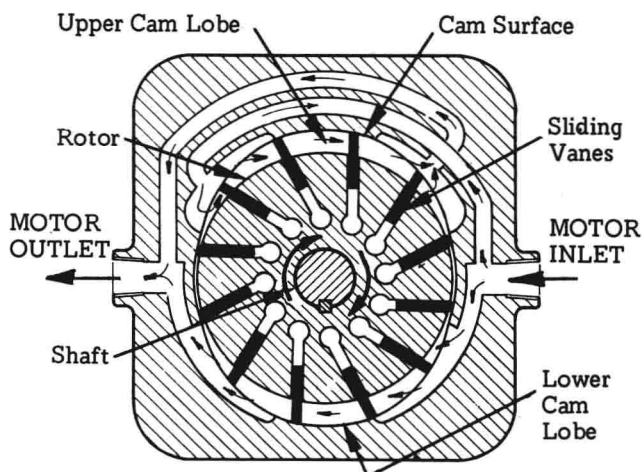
(B). Vane-Type Hydraulic Motor.
